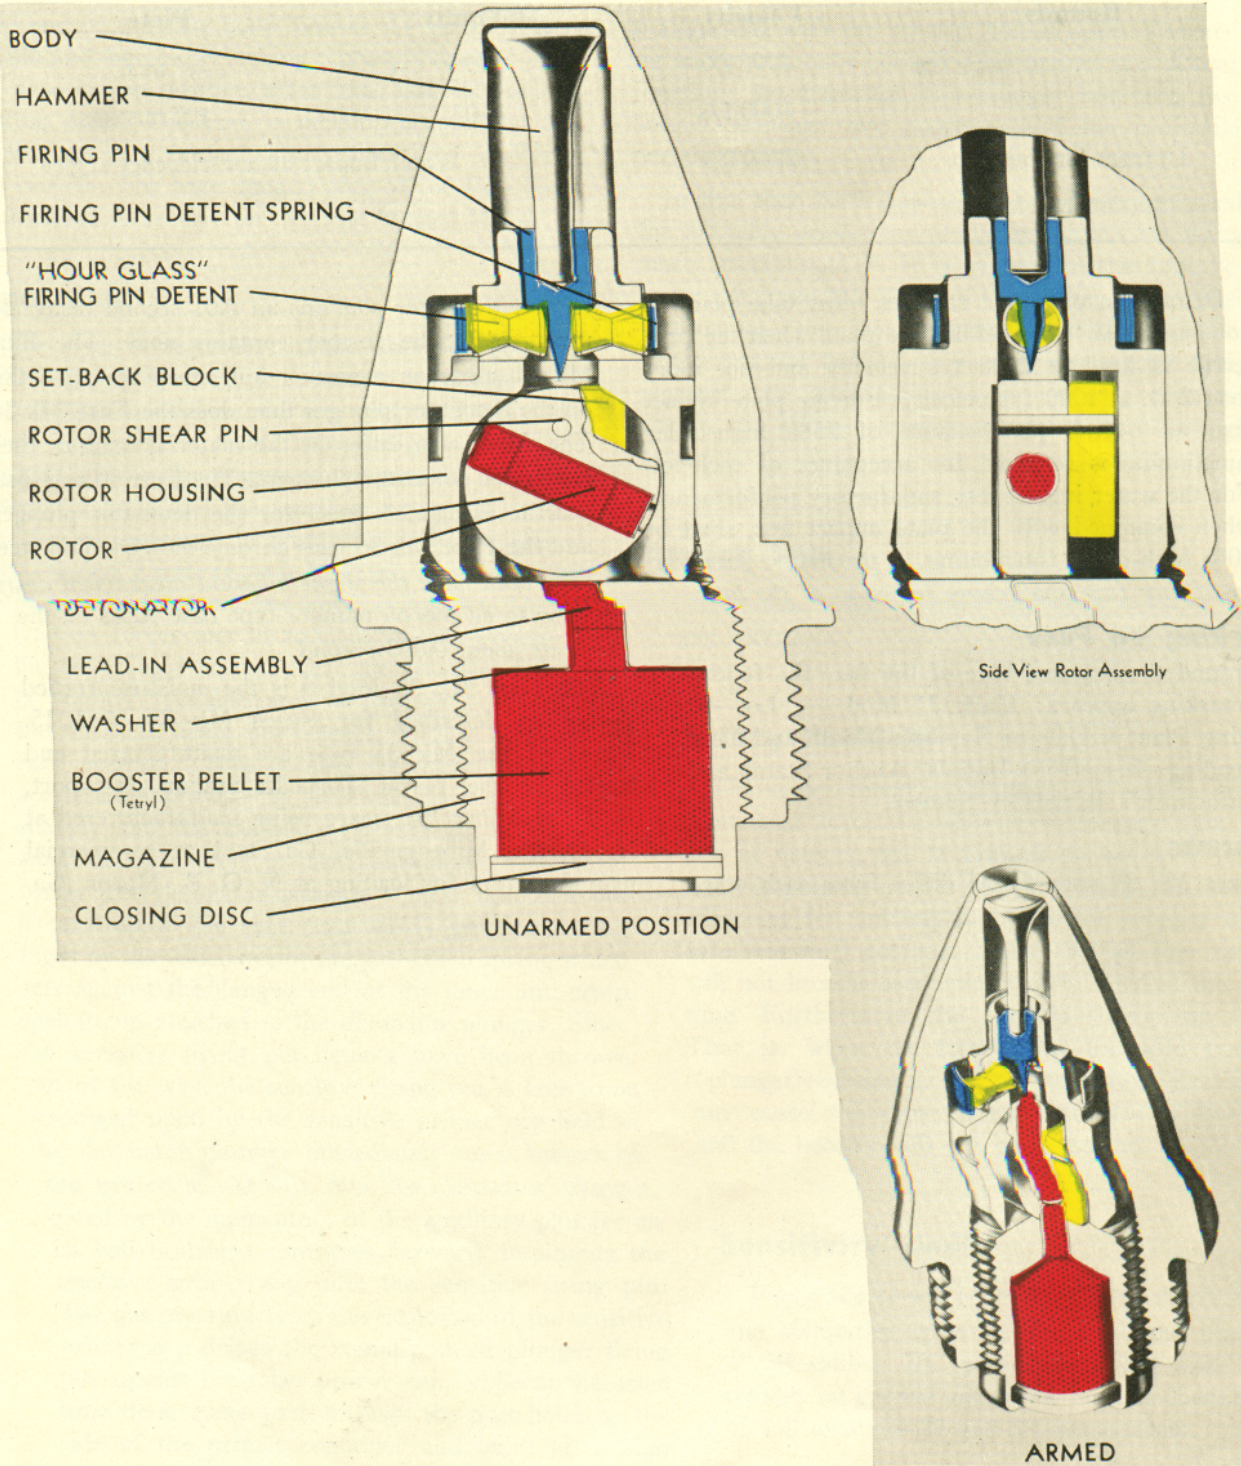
Point Detonating Fuze Mk 34—Sectional View
